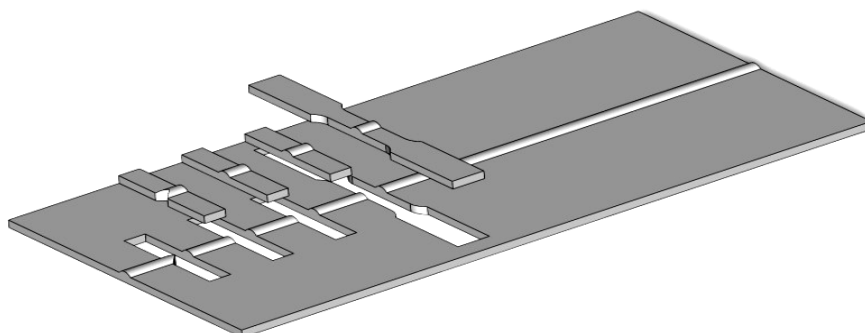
Extrusion of Specimens for Mechanical Testing and Metallurgical Testing
